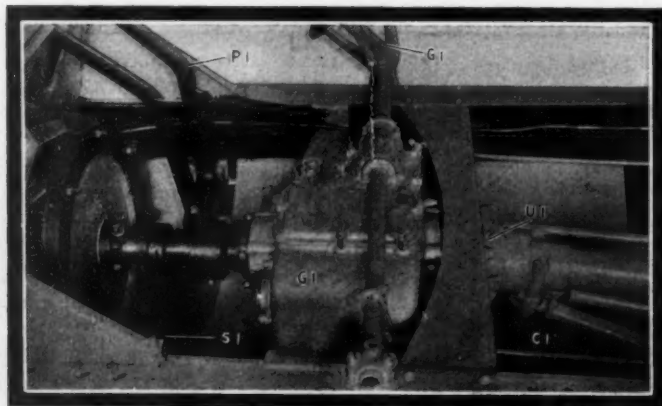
Looking at the middle of the chassis frame, showing the location of the transmission gear, clutch mechanism and universal joint at the extremity of the torsion tube.
